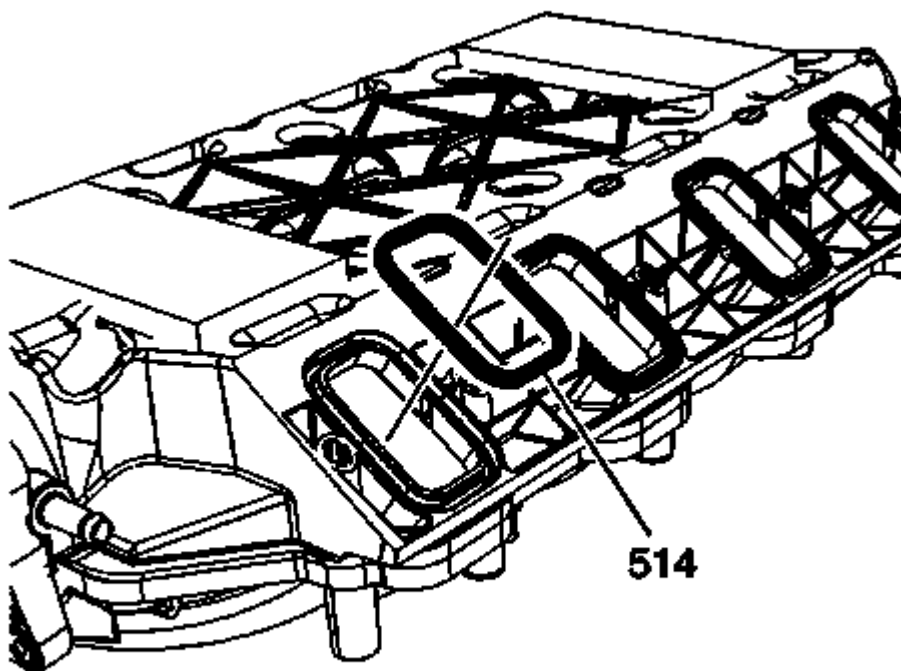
Intake Manifold-To-Cylinder Head Gaskets
